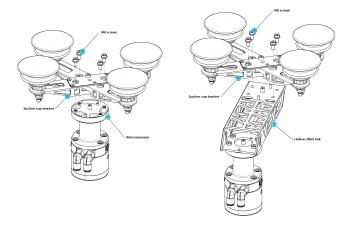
Installation of Suction Cup Brackets on Gripper Offset Equipment
